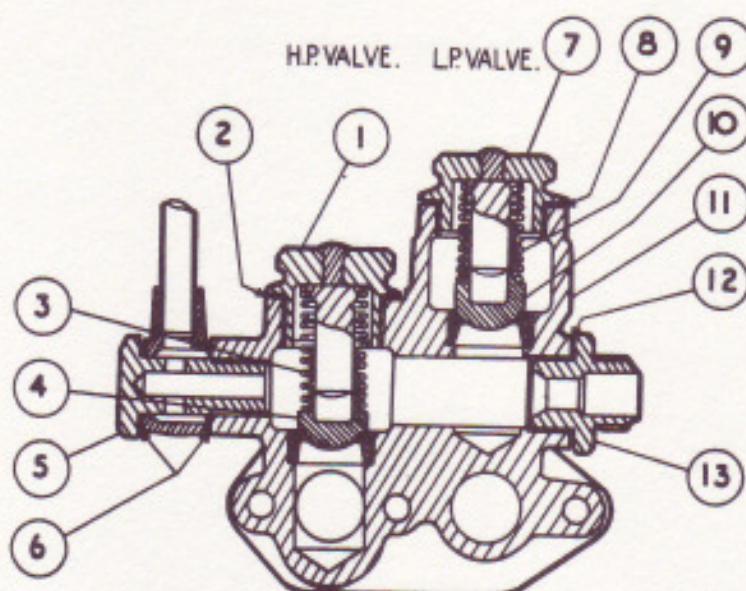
SECTION OF OIL PRESSURE RELIEF VALVE UNIT.
